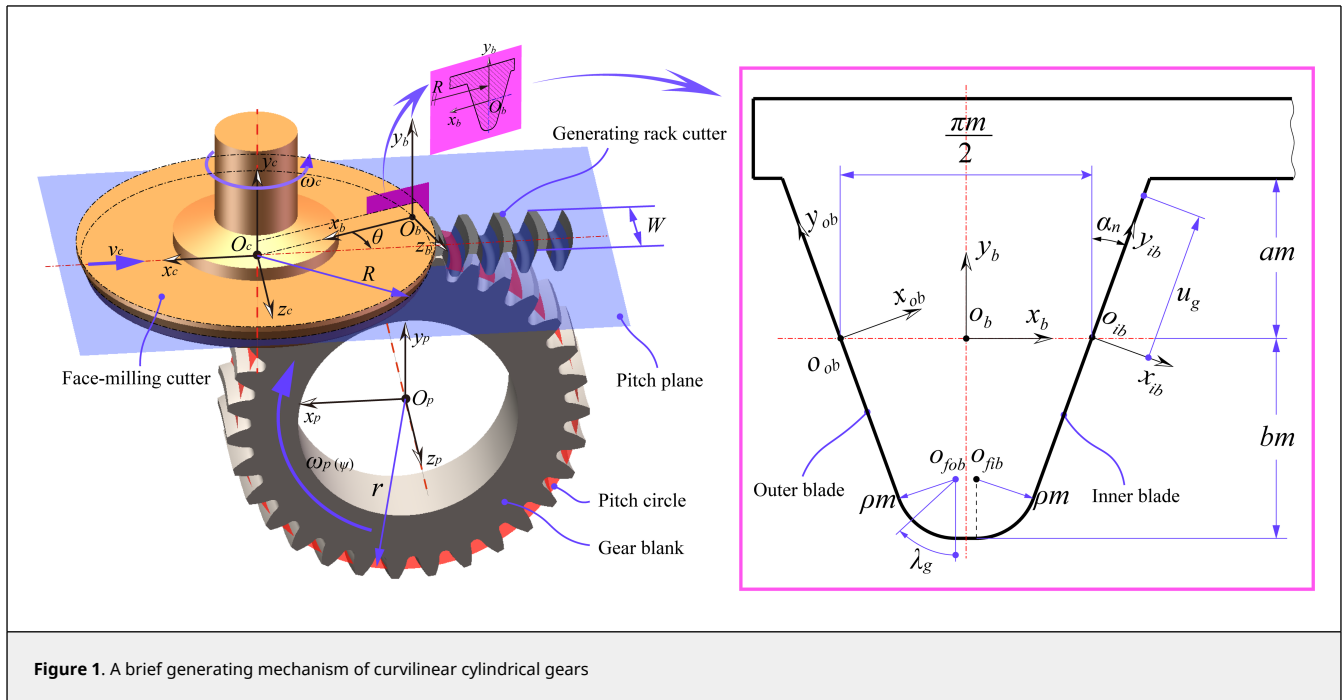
A brief generating mechanism of curvilinear cylindrical gears
